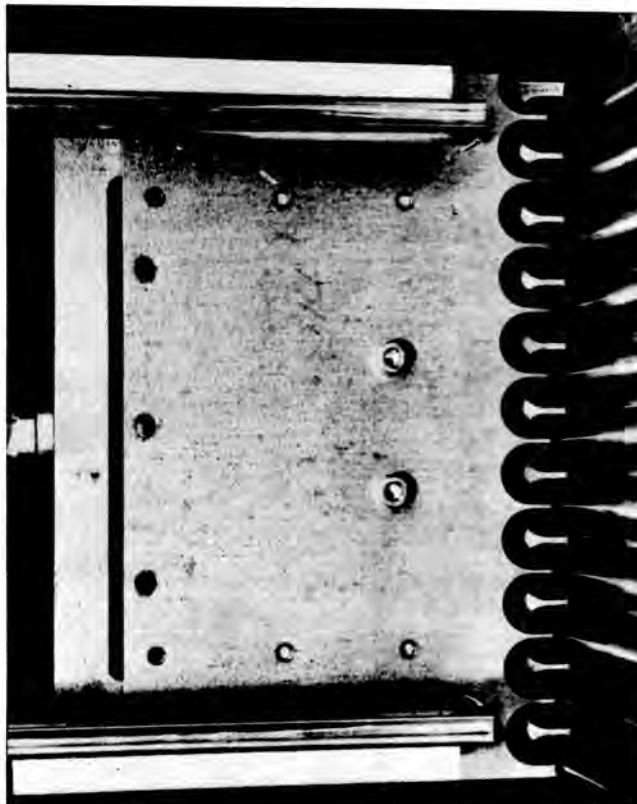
Finger Plates on Rod Arraying Mechanism.
